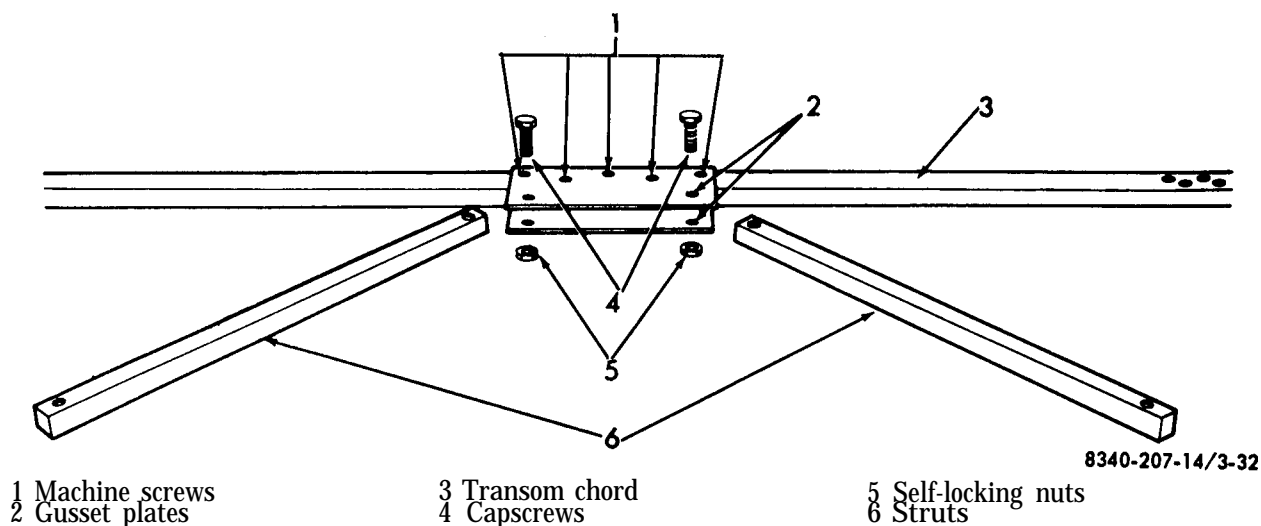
Transom chord and struts, disassembly and reassembly.
